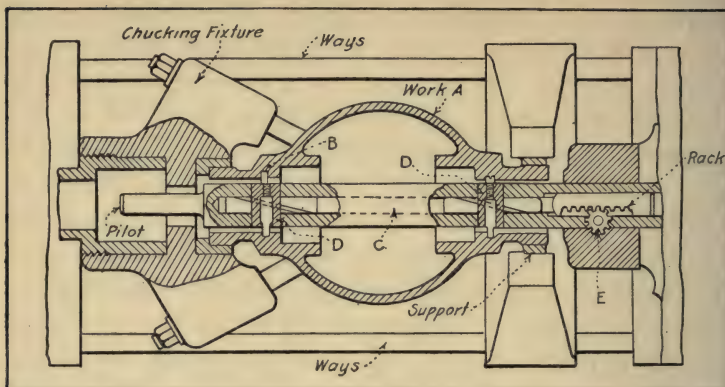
AN ELABORATE RECESSING TOOL FOR A LARGE STEEL CASING
